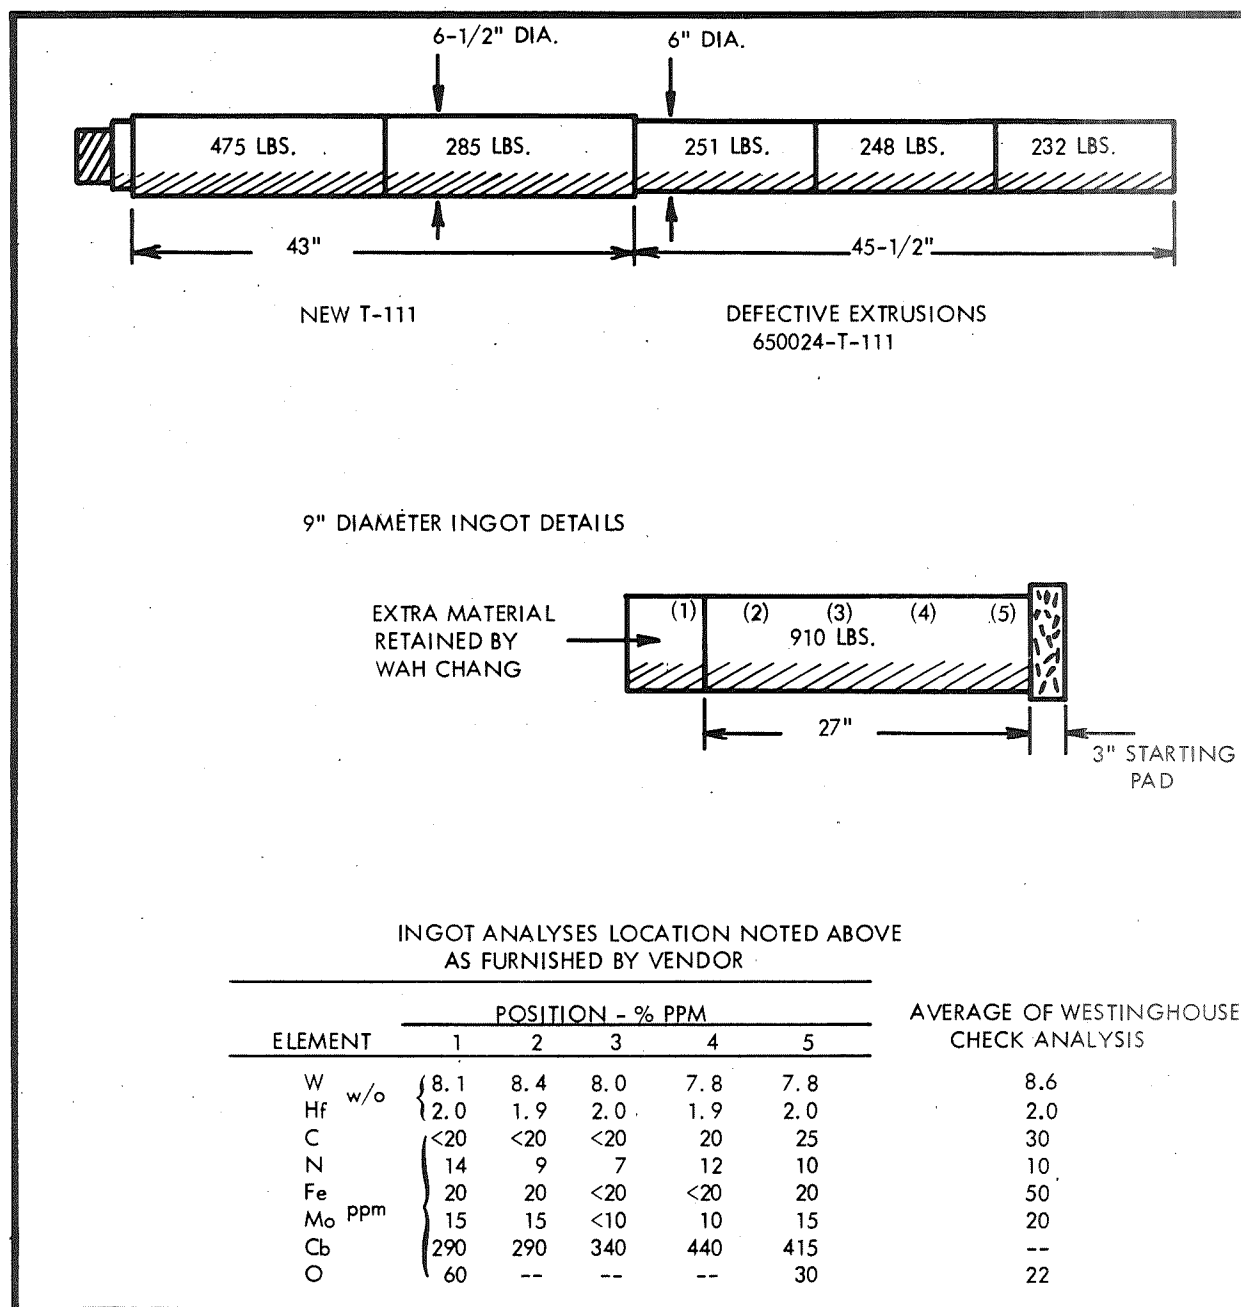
Welded Tube Shell Ingot Preparation and Chemical Analysis
